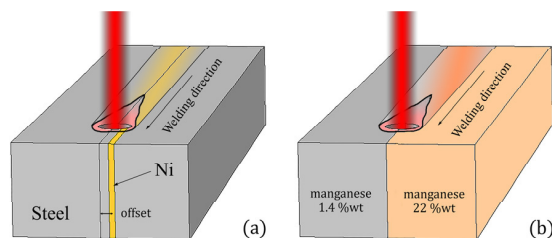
Welding configuration cases 1, 2 (a) and case 3 (b).
